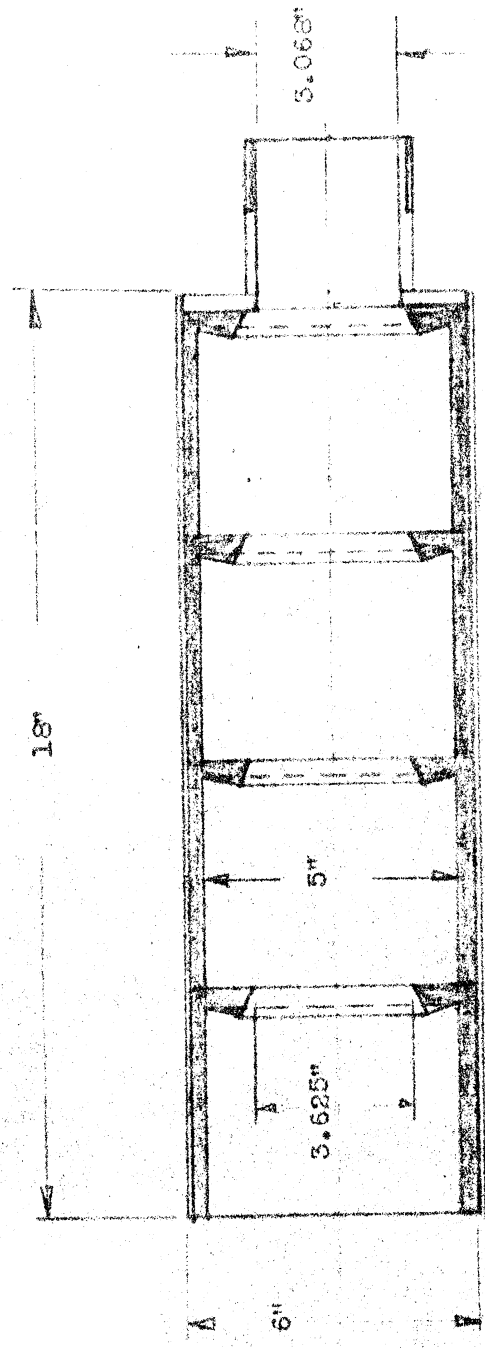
Burner viewed thru Test Stand Observation Window - Combustion Chamber Design
